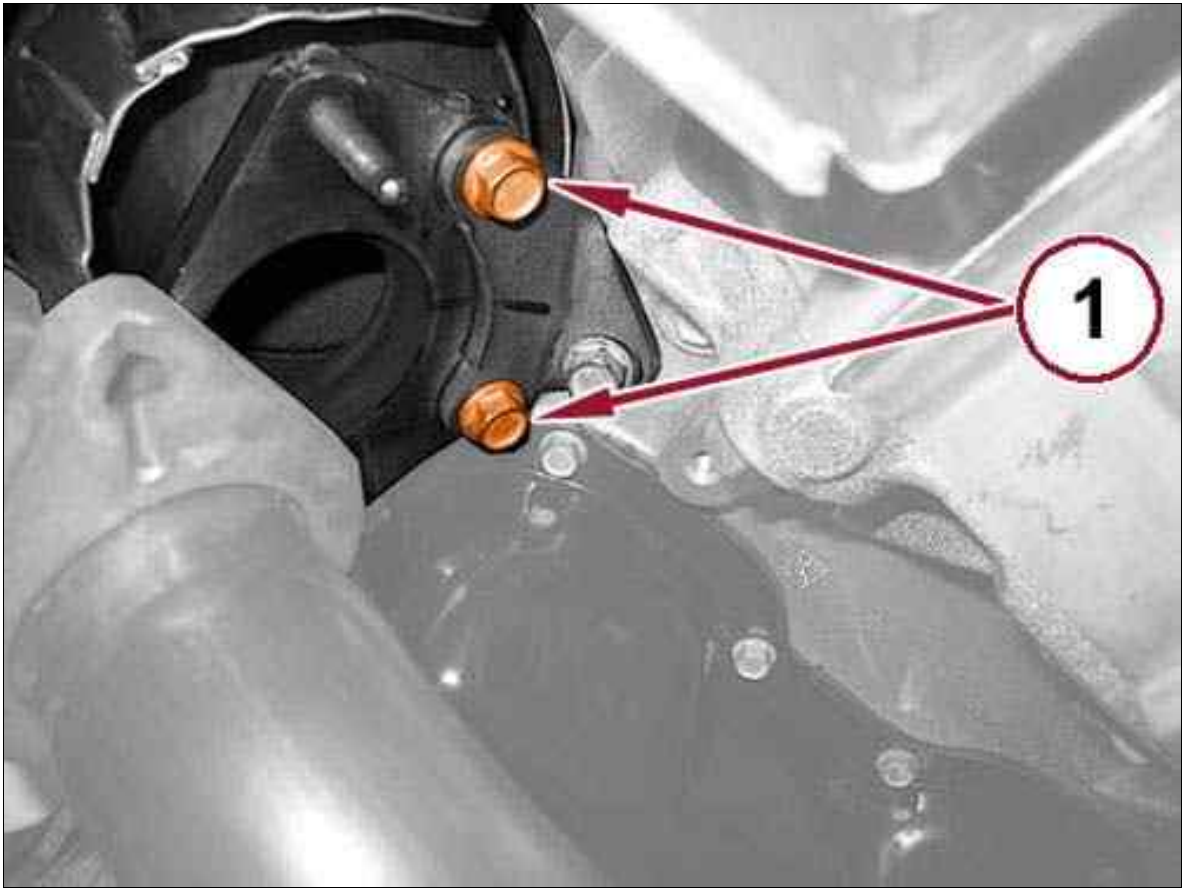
Exhaust Manifold Catalyst, Nuts & Bolts
